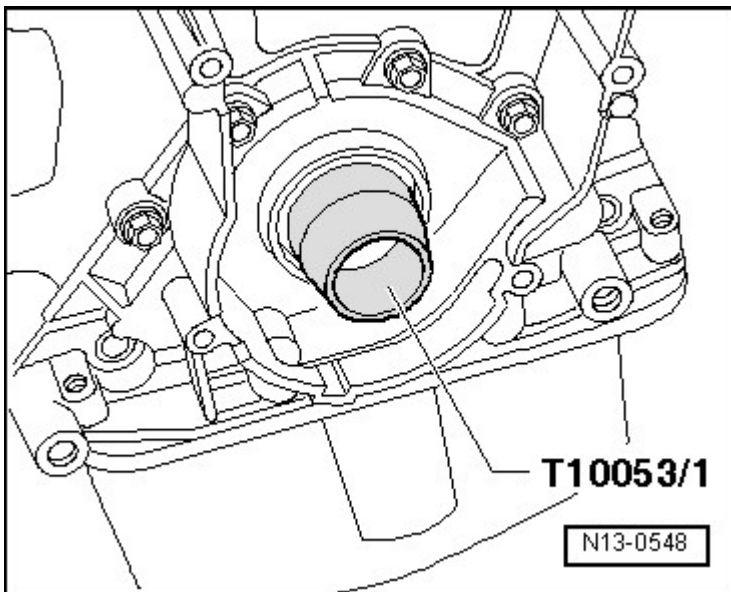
Fitting Guide Sleeve T10053/1 Onto Crankshaft Journal
